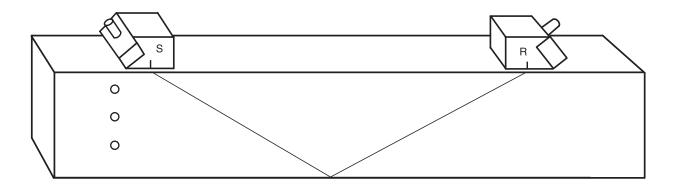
Typical Alternate Reflectors (see 6.17) (Located in Weld Mock-ups and Production Welds)
